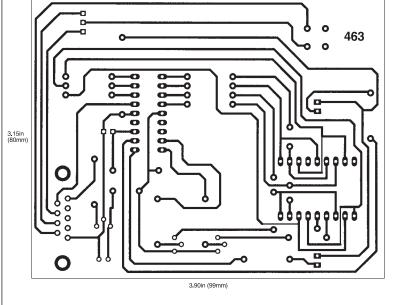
Slave p.c.b. component layout and full-size copper foil master. A completed board is shown above.
